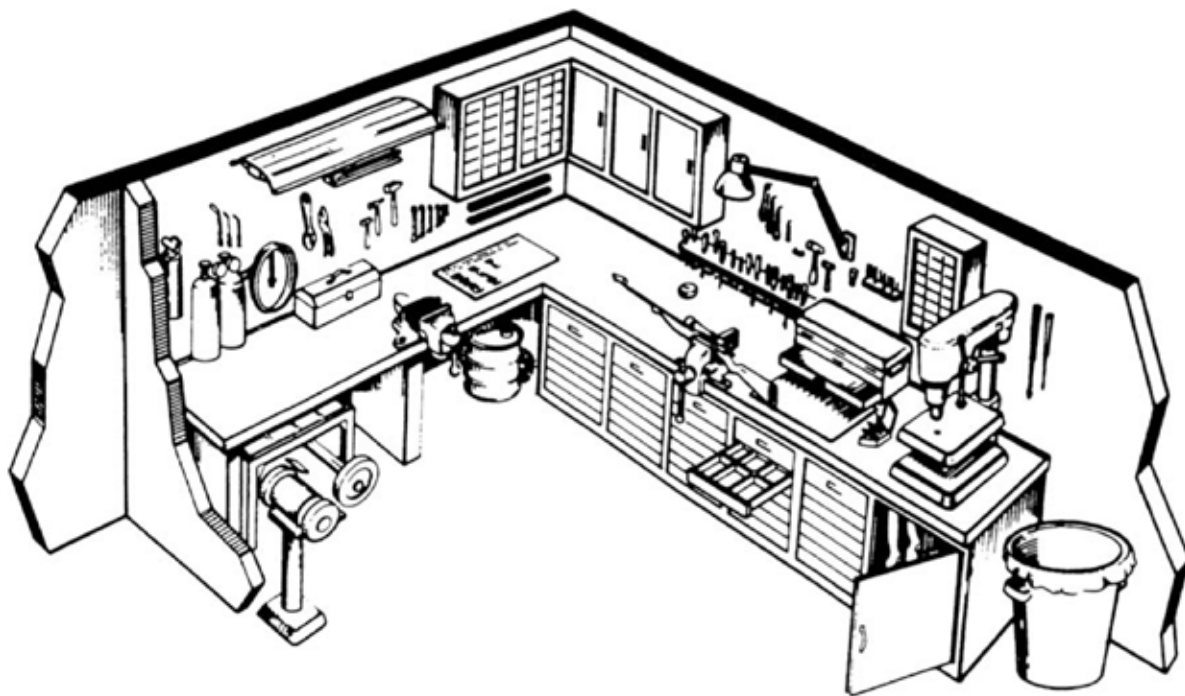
Excellent shop layout for the beginning professional. A metal-turning lathe and milling machine can be added later.
